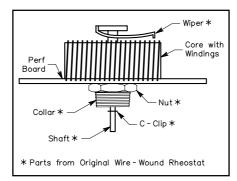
Side view of the modified rheostat assembly. The wiper and brush make contact with the core windings, jumping from one winding to another as you turn the wiper shaft.
